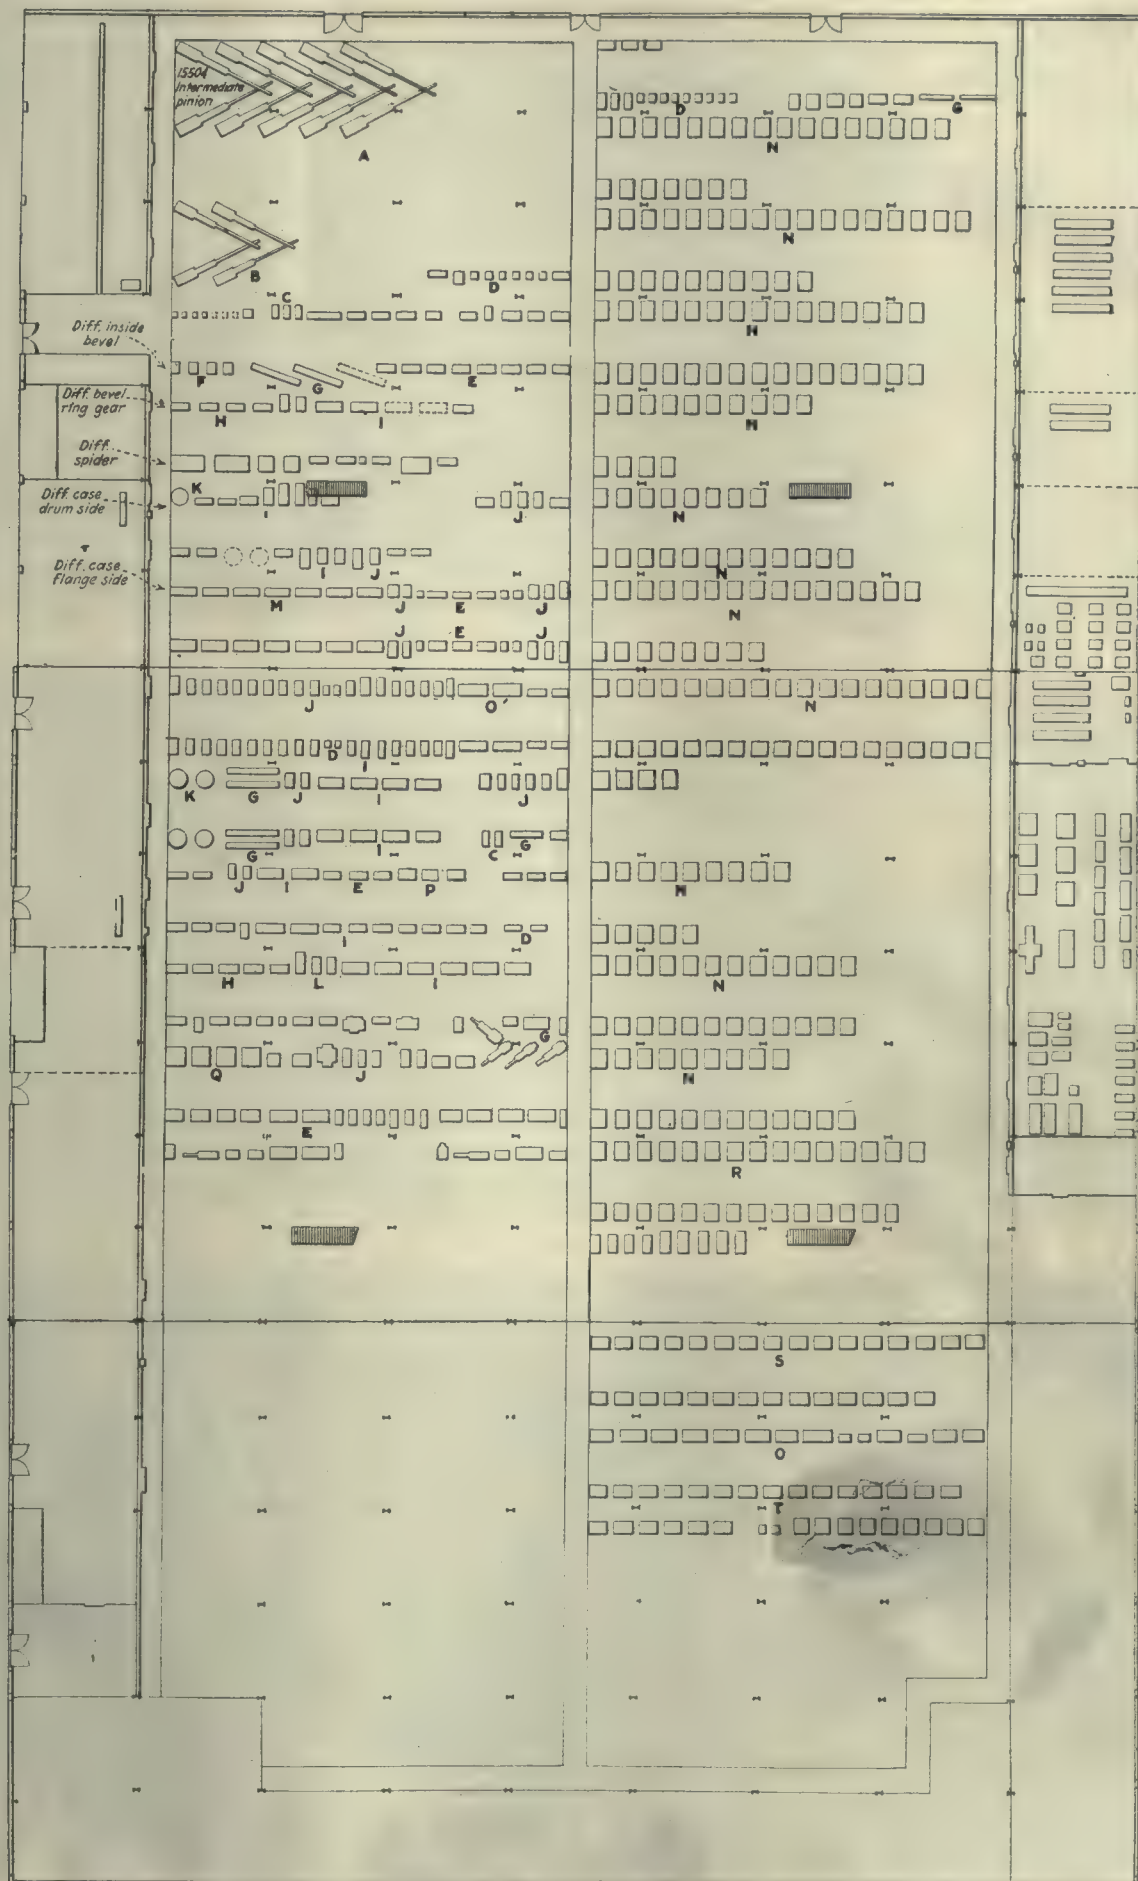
FLOOR PLAN OF SHOP, SHOWING MACHINE TOOL LAYOUT
